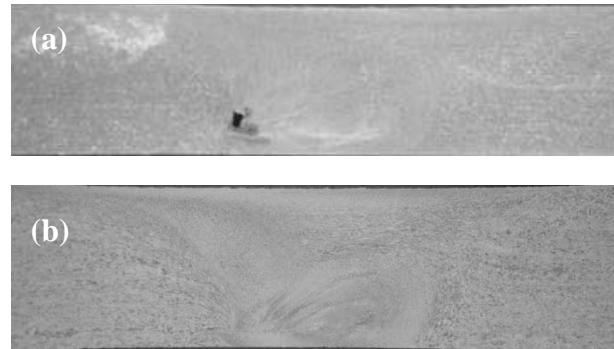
a) weld presenting a defect type tunnel; b) weld without defects identifiable by microscopy.
